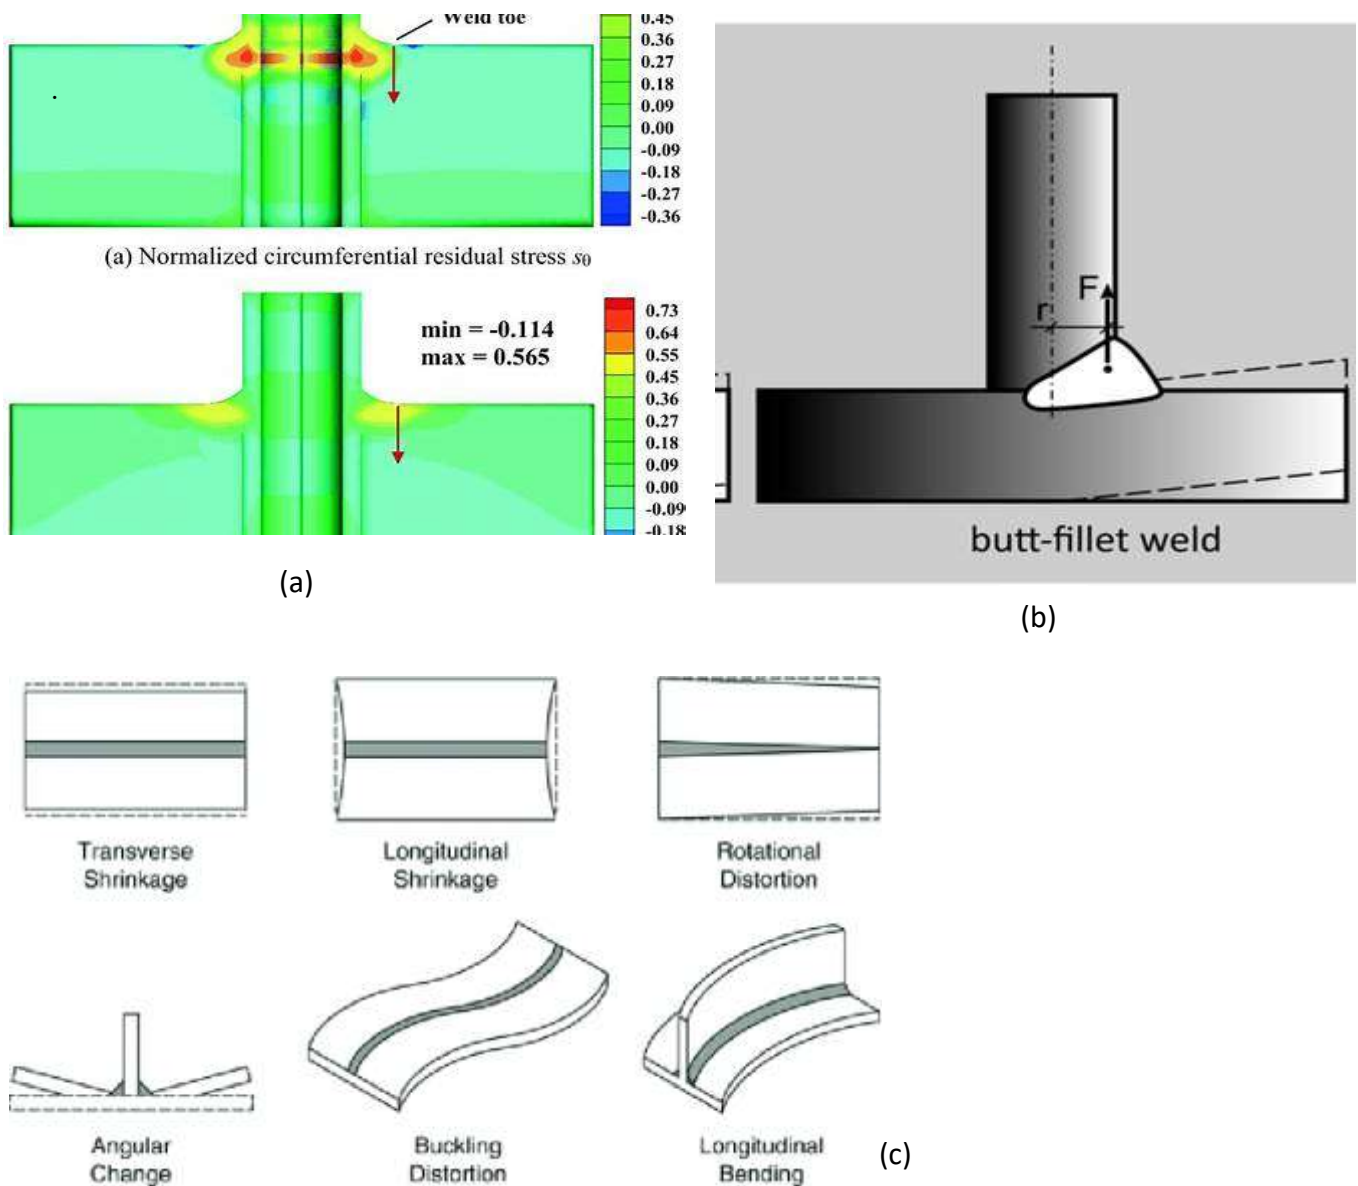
(a) Residual Stress Distribution near Weld toe/ Fusion Boundary (b) Butt-Fillet Weld Geometry and Force Transfer (c) Welding Induced Distortion
